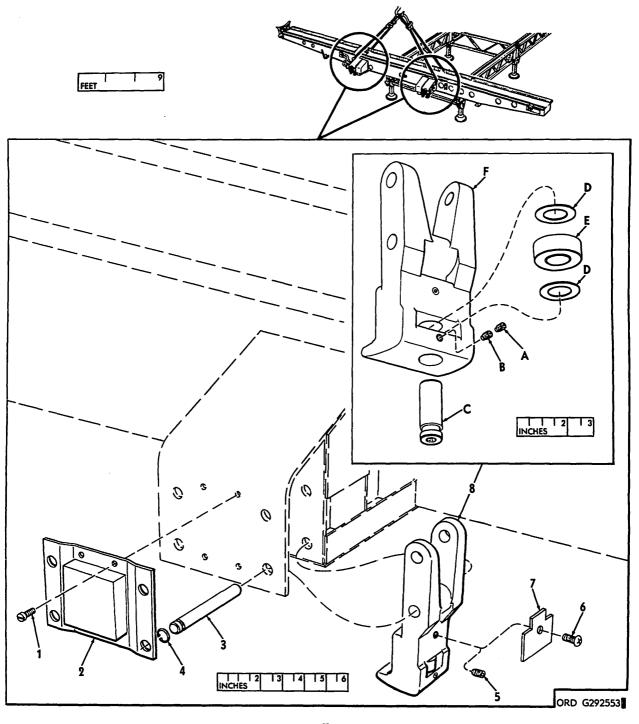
Stop and positioning tube assembly - disassembly and assembly.
